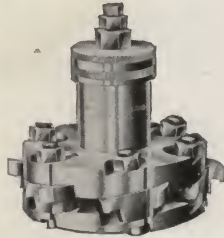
Philbrick 6" 4-knife Universal Moulding Head. This type of head is made in any length up to 12" and with either four or six sides. Milled to pattern cutters are fastened to the faces of these heads with Philbrick patent clamps which are longitudinally adjustable the full length of the head. The head is reversible and will work on all four sides of a moulder with a change of self centering sleeves.
